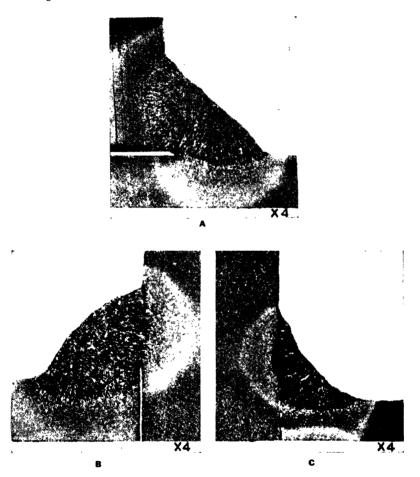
Fillet welds (magnified 4 times): A. Flat face, B. Convex, C. Concave
